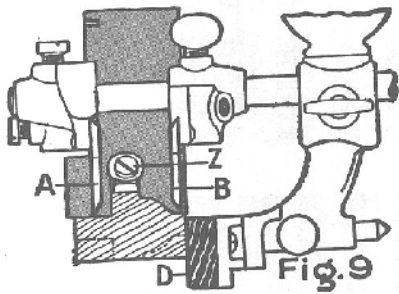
SASH PLANE—The Sash Cutter is similar to the tool used for cutting the tongue on matched boards, as it has a Stop (Z) which can be adjusted to regulate the depth of the cut. One side of the moulding is cut first, the work is then reversed and the operation is repeated on the other side. Fence (D) is used as in Matching. Spurs not used.
